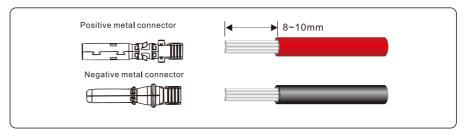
Removing insulation layer for DC cable (unit: mm)
